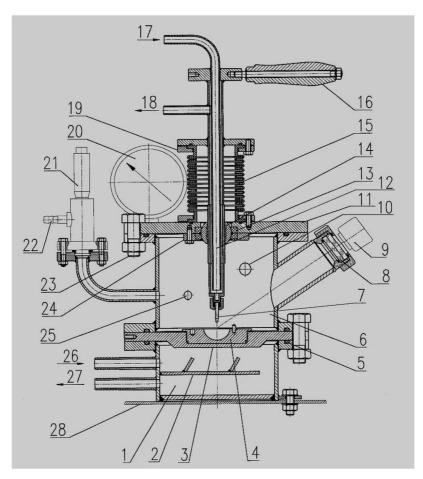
Design of the main part of the electrical arc furnace devised for the noncontact arc ignition. Components numbered 1–28 are as follows: 1 - cooler, 2 - flow distributor, 3 - crucible housing, 4 - cold crucible, 5 - O-ring, 6 - melting chamber, 7 - tungsten end electrode, 8 - window, 9 - lamp, 10-connection to vacuum pump, 11 - chamber lid, 12 - electrode tube, 13 - sliding rings, 14 - ball, 15 - bellows, 16 - handle, 17 - water inlet, 18 - water outlet, 19 - divided ring, 20 - pressure meter, 21 - metering valve, 22 - inert gas inlet, 23 - screw joint, 24 - holding ring, 25 - connection to safety valve, 26 - water inlet, 27 - water outlet, 28 - supporting table
